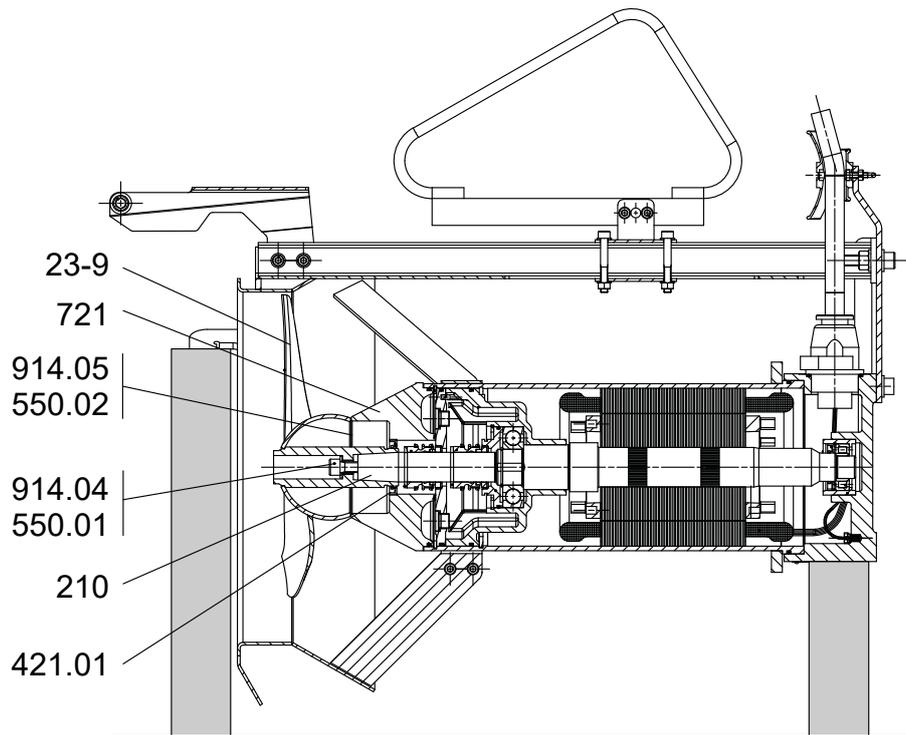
Mounting the axial propeller of an Amaline 200, 300 with motor 0 6 or 2 6, 400
